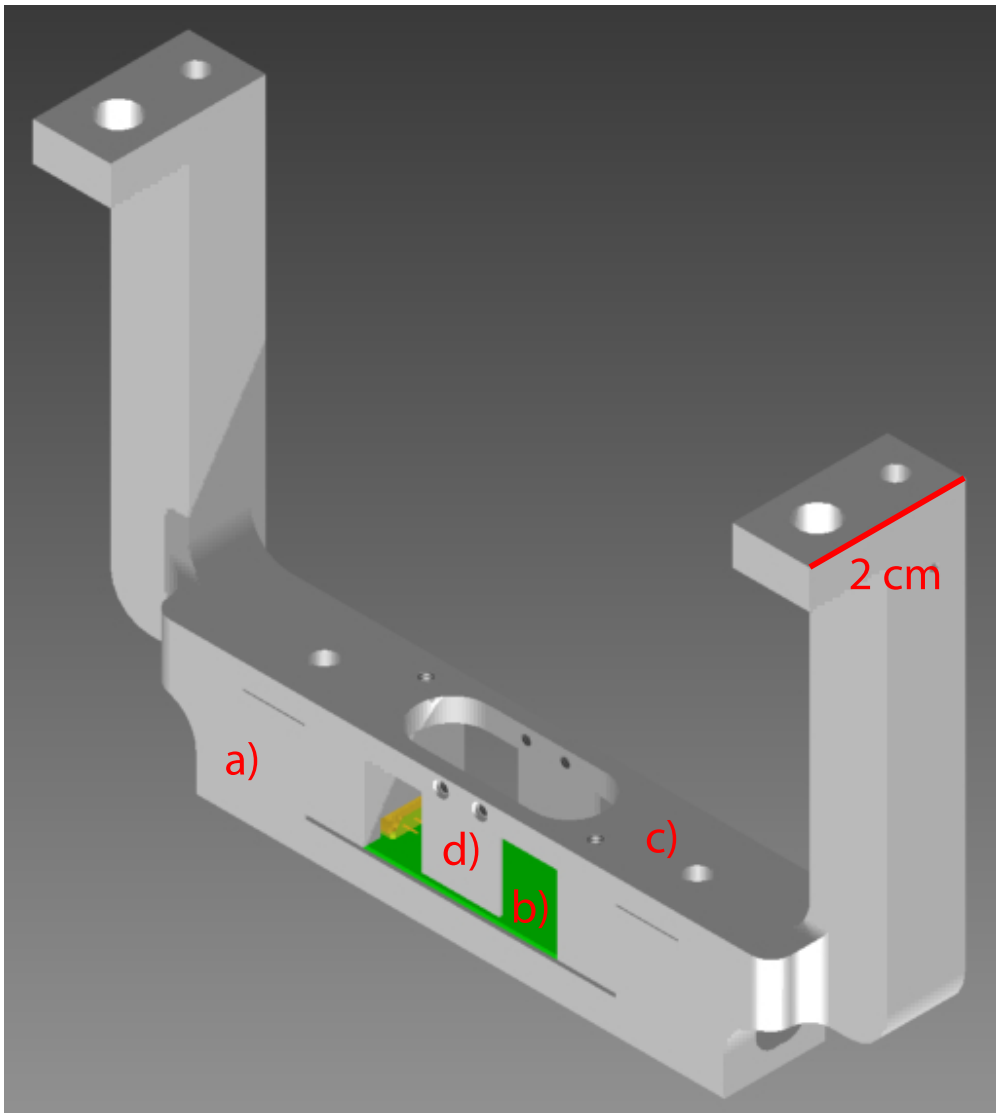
CAD drawing of the sample-holder. (a) the sample-holder arm, (b) the PCB, (c) the sample-holder arm and (d) shielding plates.
